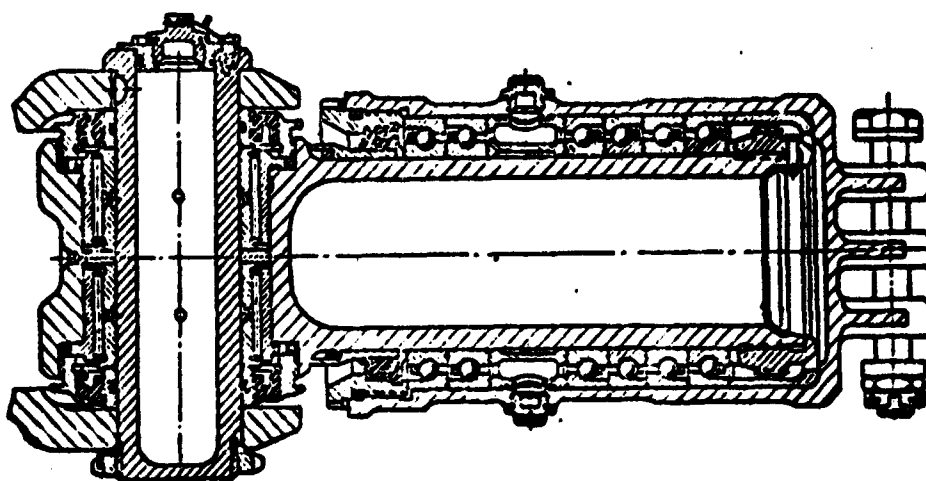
Axial hinge of rotor hub implemented on multiple radial thrust bearings.
